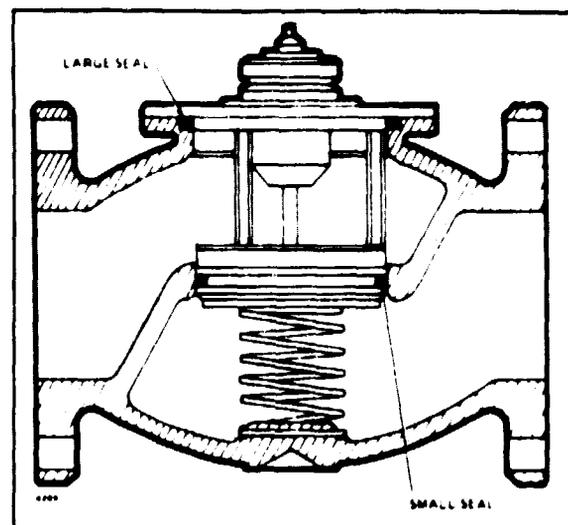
PROPER POSITIONS OF VALVE AND BONNET SEALS IN A 4 in. VALVE.
